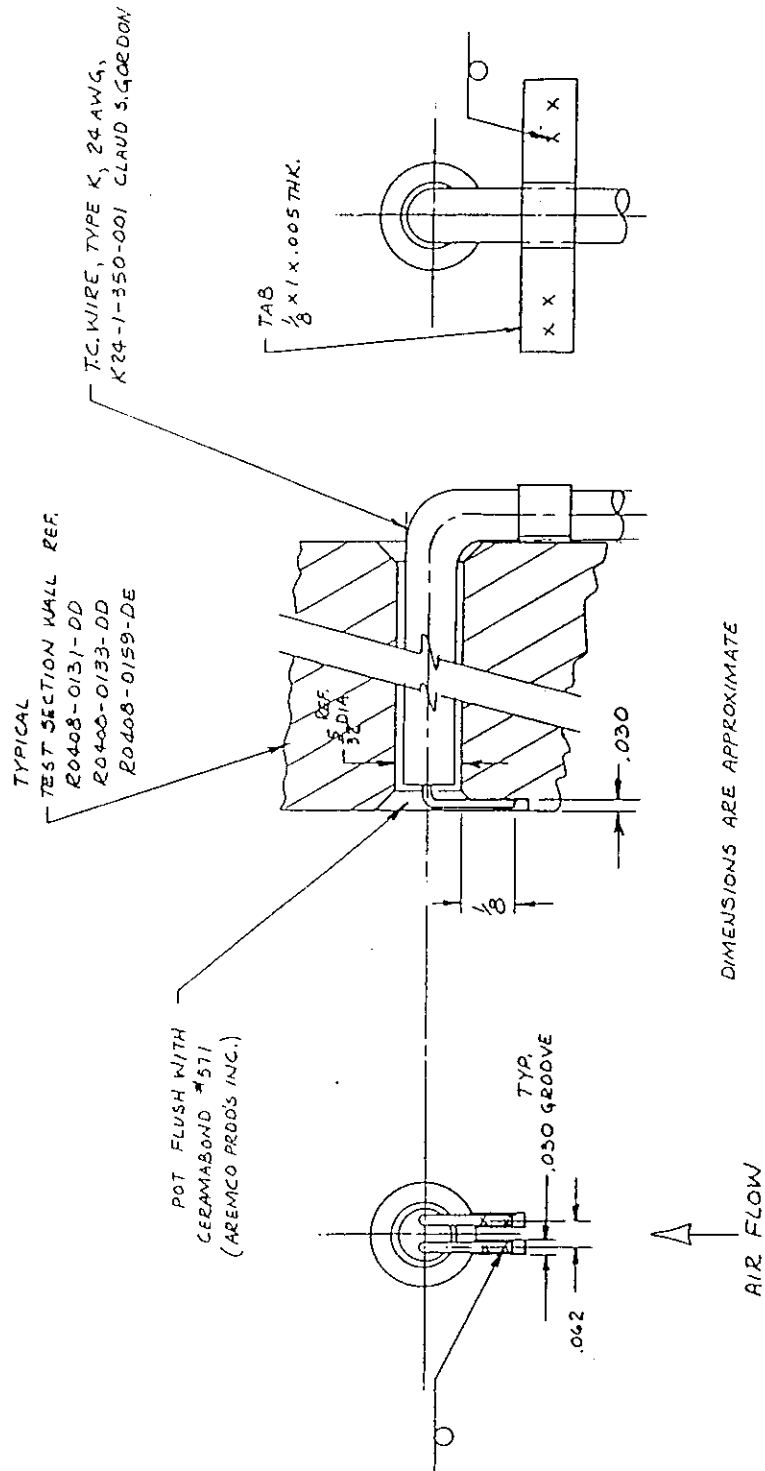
Test Section Thermocouple Installation Details (ANL Dwg. No. R0408-0617-DB).
